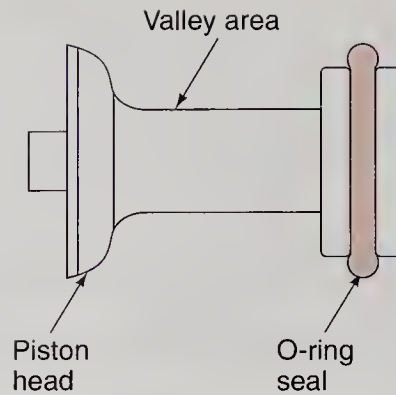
Simplified spool-shaped piston for master cylinder. .
